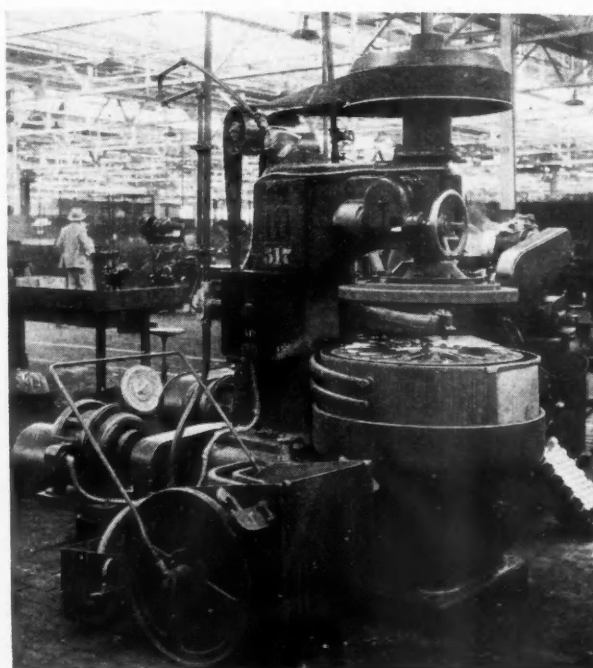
(below)—Norton abrasive type lapping machine with fixture holding 16 piston pins
